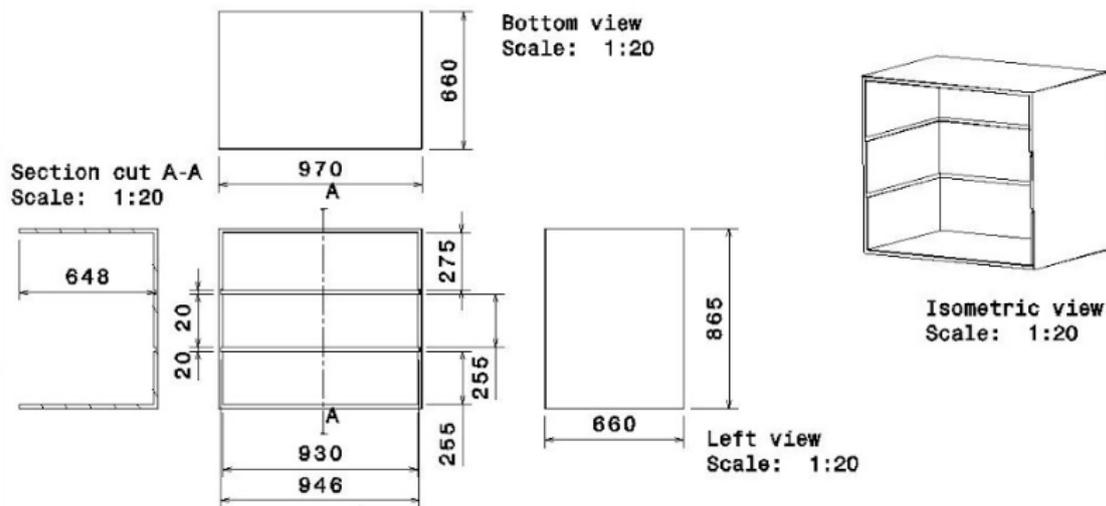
Technical drawing of the further developed storage space in the back with submersible function, small box inside the shell.
